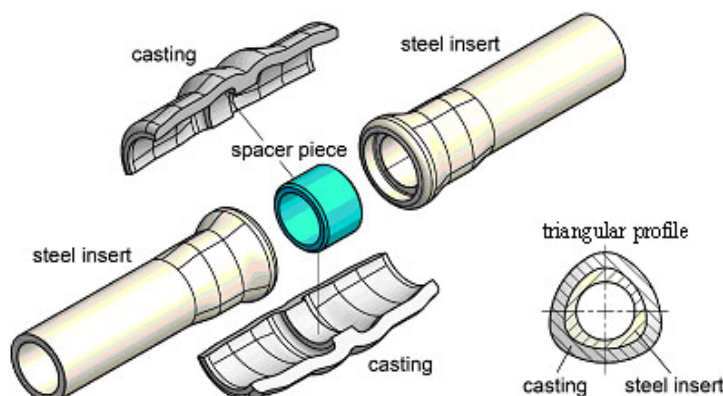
Exploded drawing of the squeeze cast demo prototype with a pair of inserts of shaped steel tubes [5] and the cross section of the triangular segment
